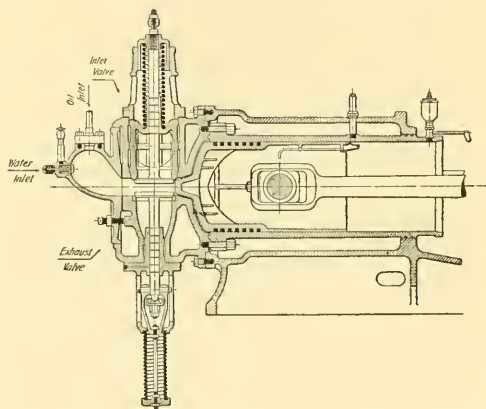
SECTION OF RUSTON PROCTOR OIL ENGINE CYLINDER
